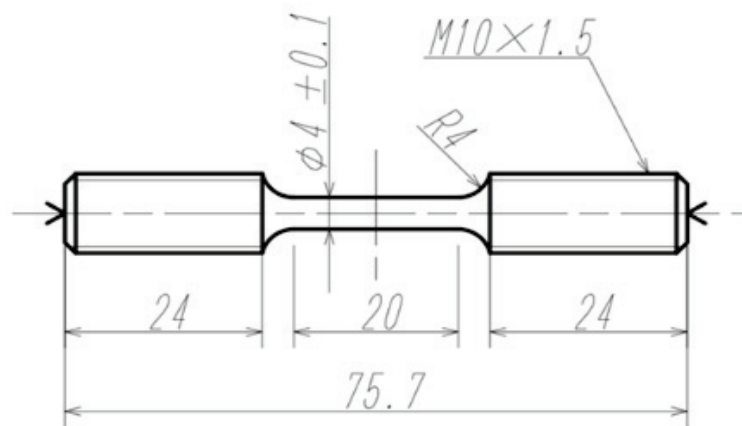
Schematic of a SSRT specimen. (Unit: mm)
